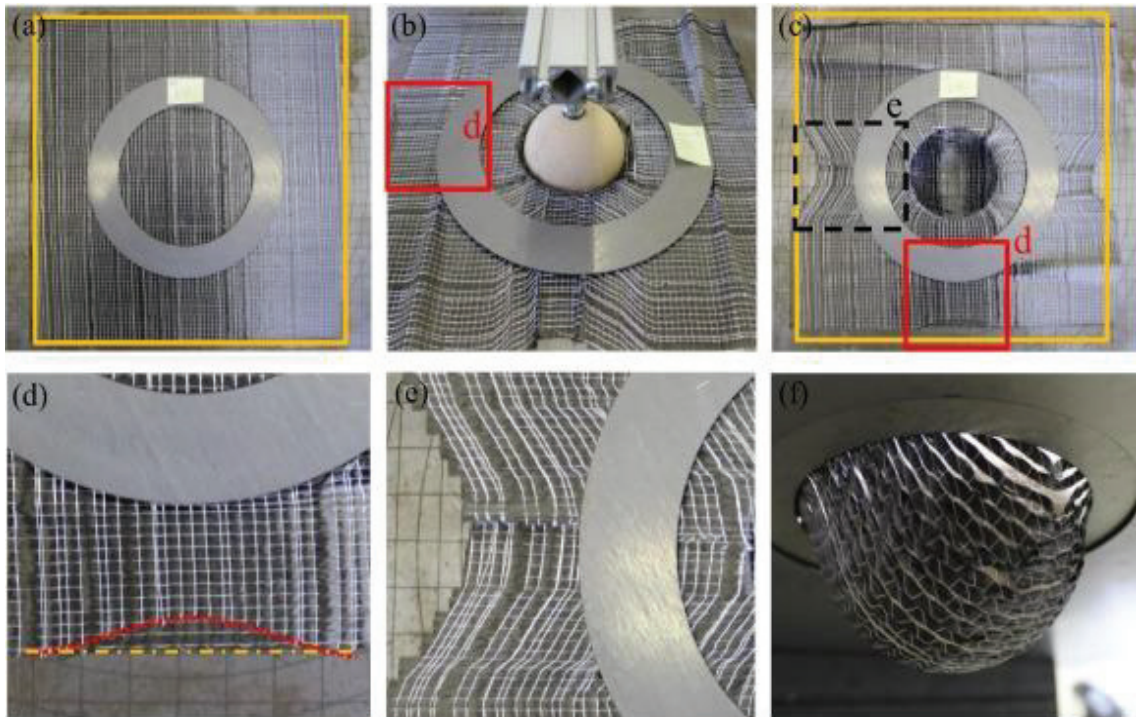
Hemisphere Test of UD-NCF. (a) top-view before testing; (b) side view after testing; (c) top-view after testing with removed hemisphere forming tool; (d) slippage between glass fibers and carbon fibers due to forming; (e) shear deformation between carbon fibers due to forming; (f) gapping between carbon fibers on hemisphere due to forming (bottom view). (Source: Schirmaier 2016²⁹)
